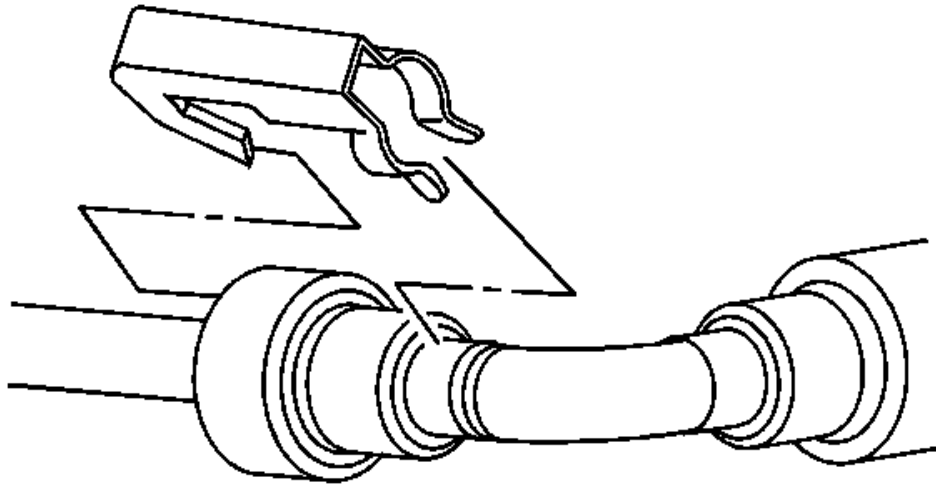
View Of Quick-Connect Fitting Retainer (Metal Collar)
